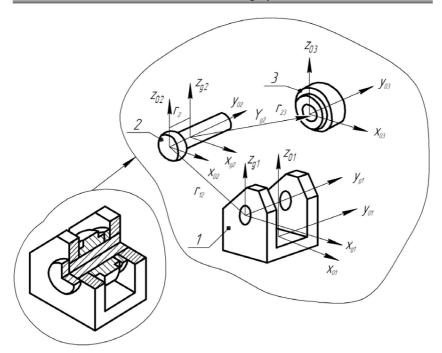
Coordinate systems of the main and auxiliary bases of parts of the assembly unit: 1 – housing; 2 – axis; 3 – roller
